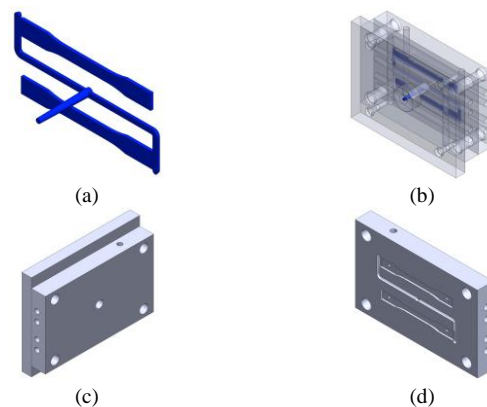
CAD models needed to simulate the injection molding process: (a) Fluid domain; (b) Assembled mold; (c) Fixed mold plate; (d) Mobile mold plate.
